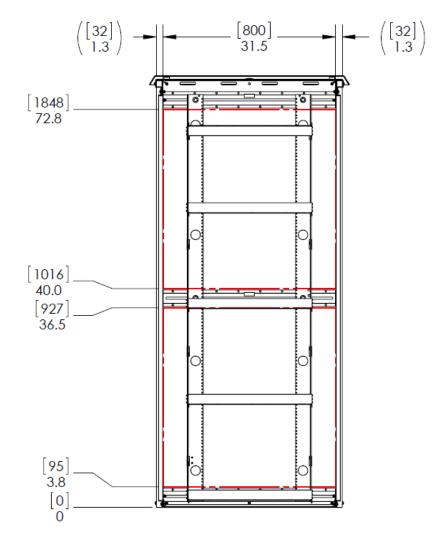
CONDUIT ACCESS ON SIDES (VIEW FROM INSIDE CABINET)
